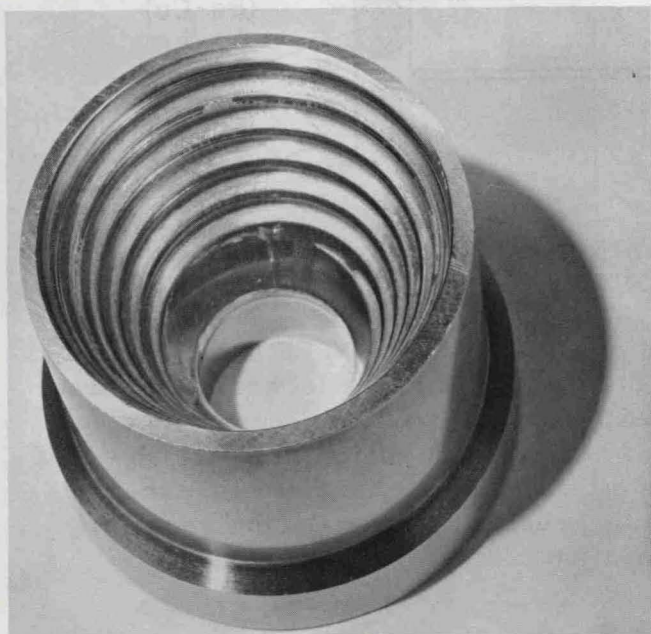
DIE DESIGN WITH HELICAL GROOVE IN CONICAL-ENTRY SURFACE
